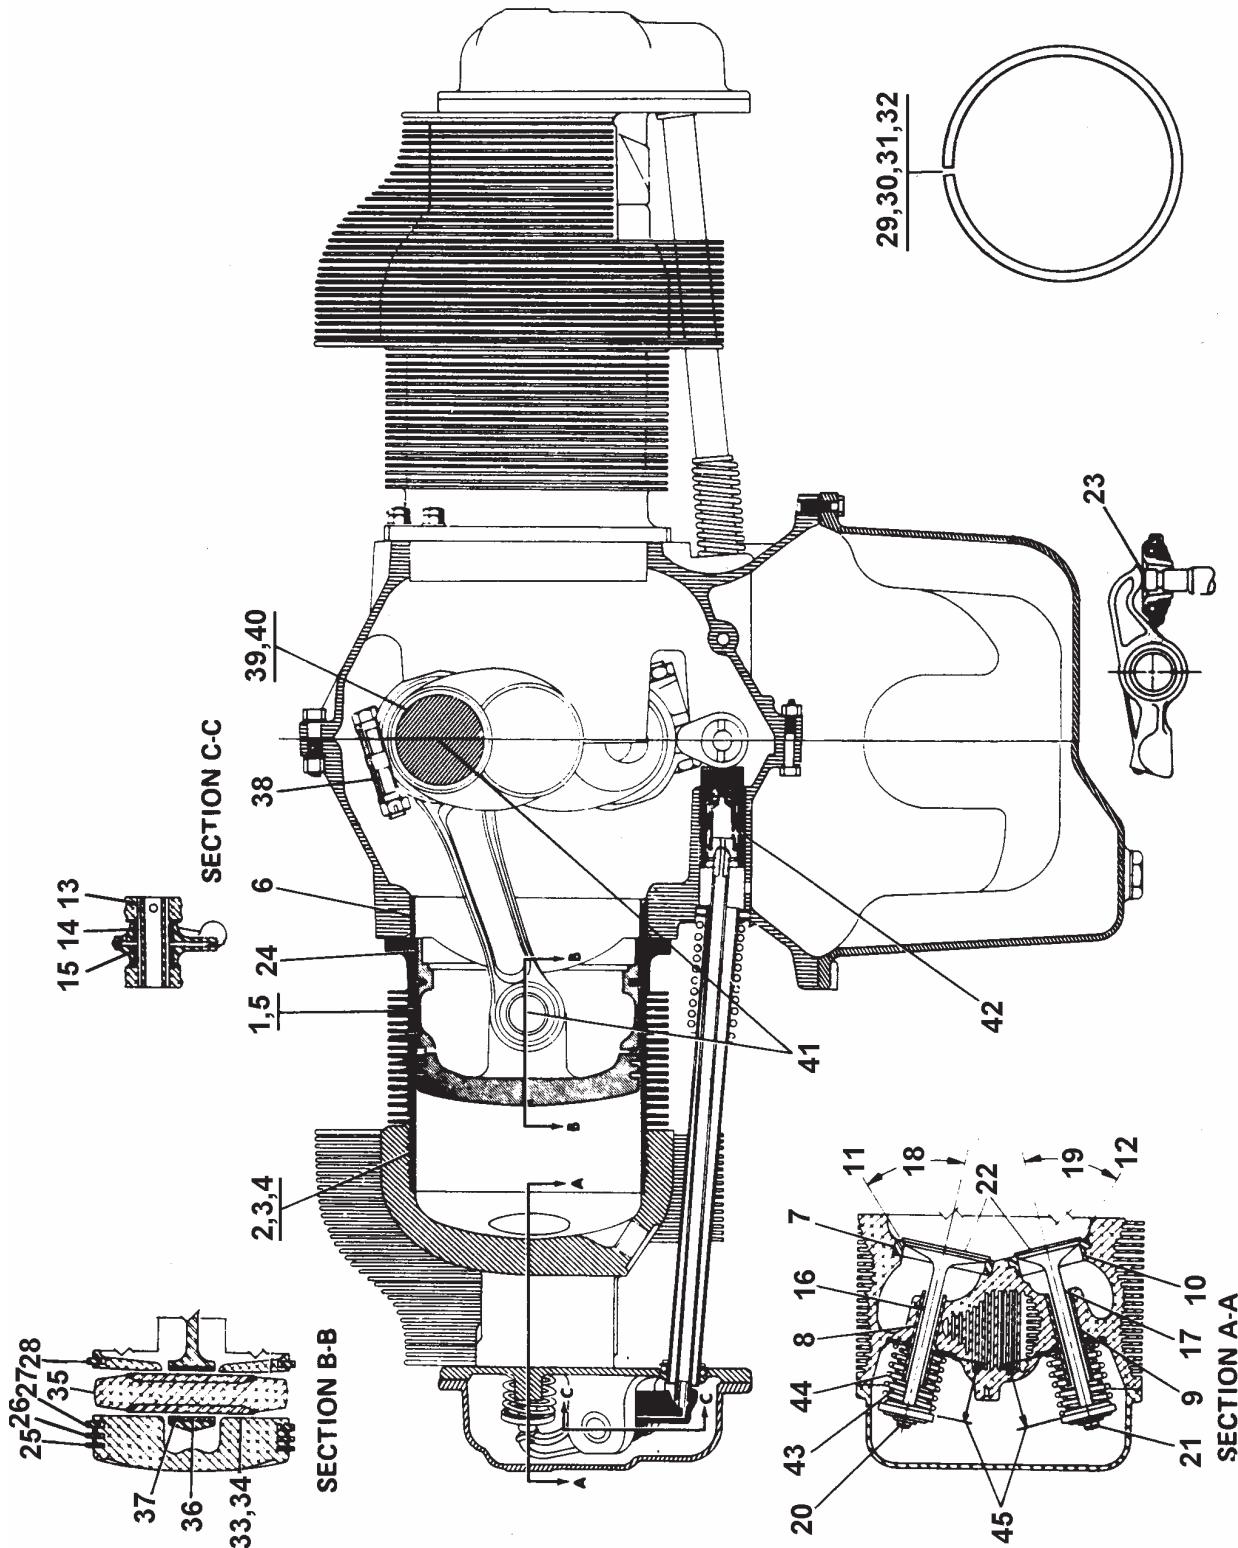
IO-550-A, B & C Cylinder Assembly
